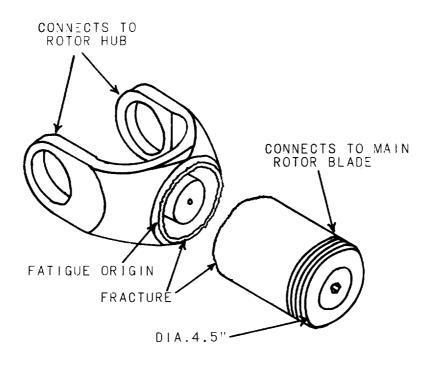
Drawing of the failed main rotor spindle, showing the location of the fracture.
